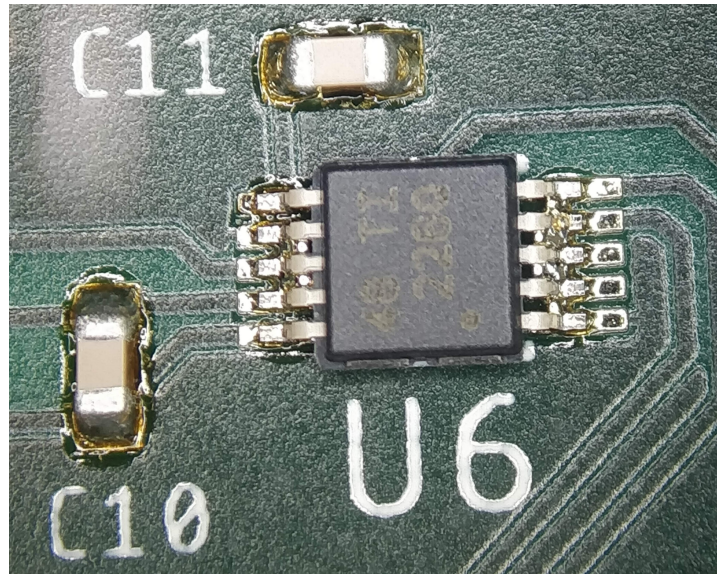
Many components had shorted pins after being soldered in the reflow oven.
